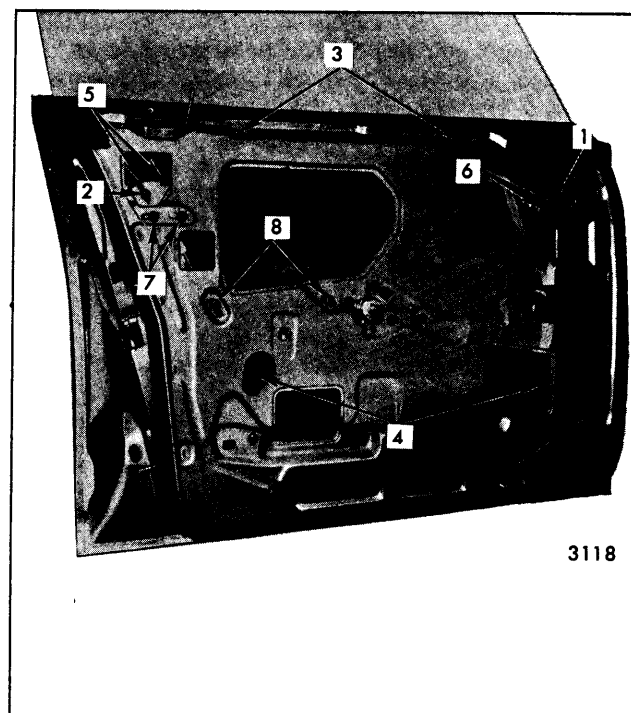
Window Removal and Adjustment - "B-39" and "C-39, 49 and 69" Styles
